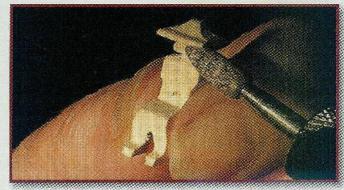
A rotary sander can be used to do some of the finish work. The blunt end of the stone is being used to finish details of the stage driver's head.
